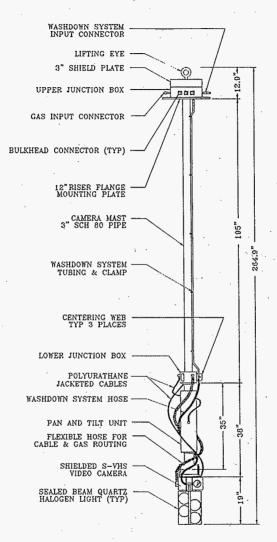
C-106 CAMERA ASSEMBLY, PHYSICAL ARRANGEMENT
